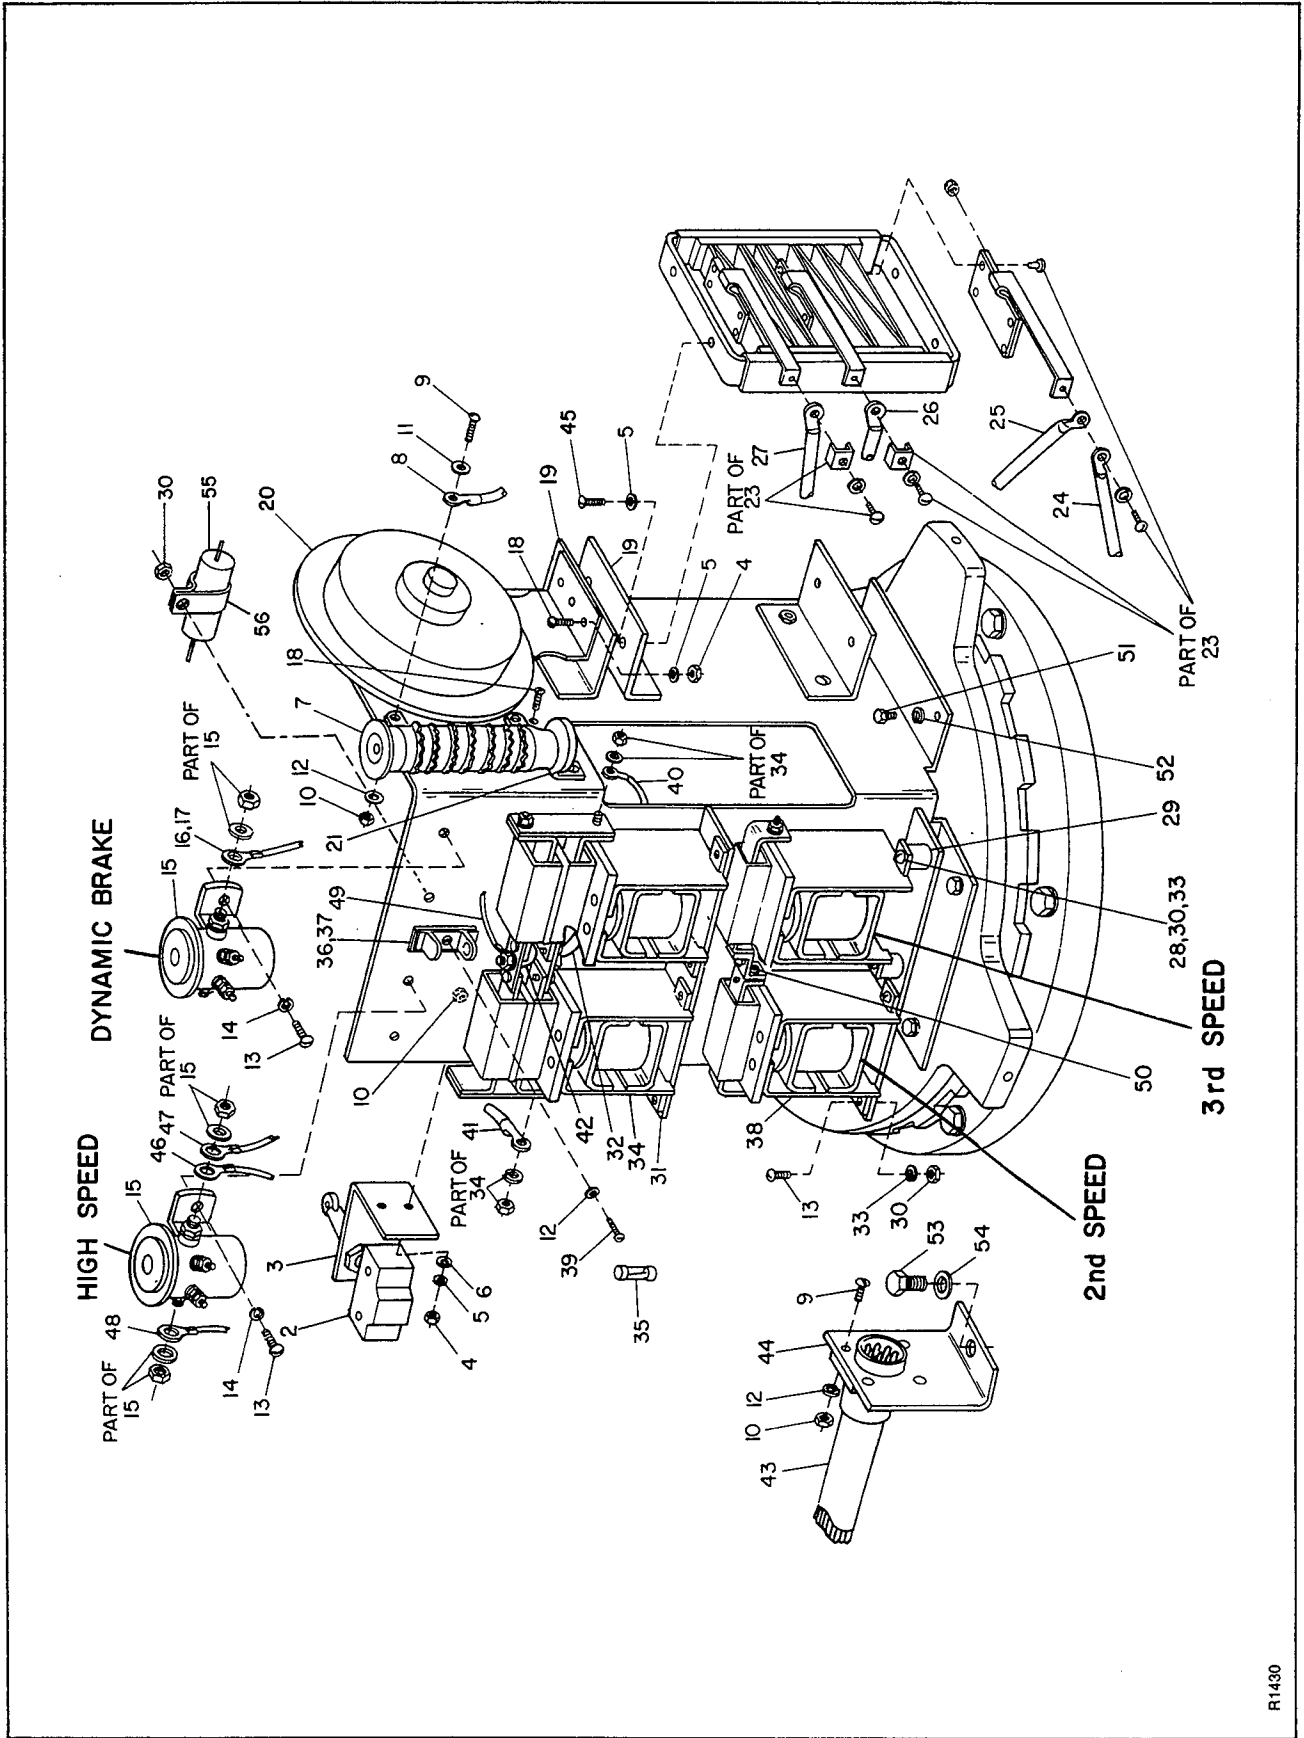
Electrical Control Panel 12V (WRT-60) (Sheet 1 of 2)
